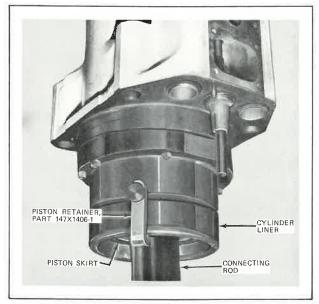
VIEW OF TOOL APPLIED TO RETAIN PISTON IN CYLINDER.
